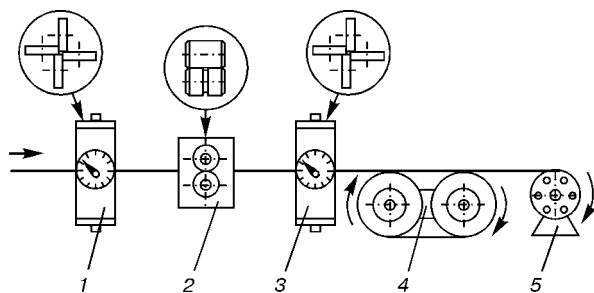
Flow chart of drawing rectangular section of the cutting edge of bimetal saws of R6M5sh wire: 1, 3 – 4 roll drawing dies; 2 – drive roll stand; 4 – double capstan; 5 – take-up spool with laying device
